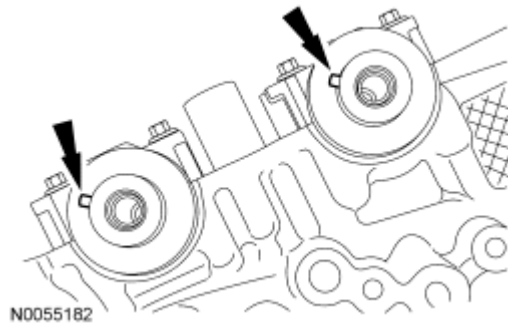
Positioning Camshafts Onto RH Cylinder Head In Neutral Position
